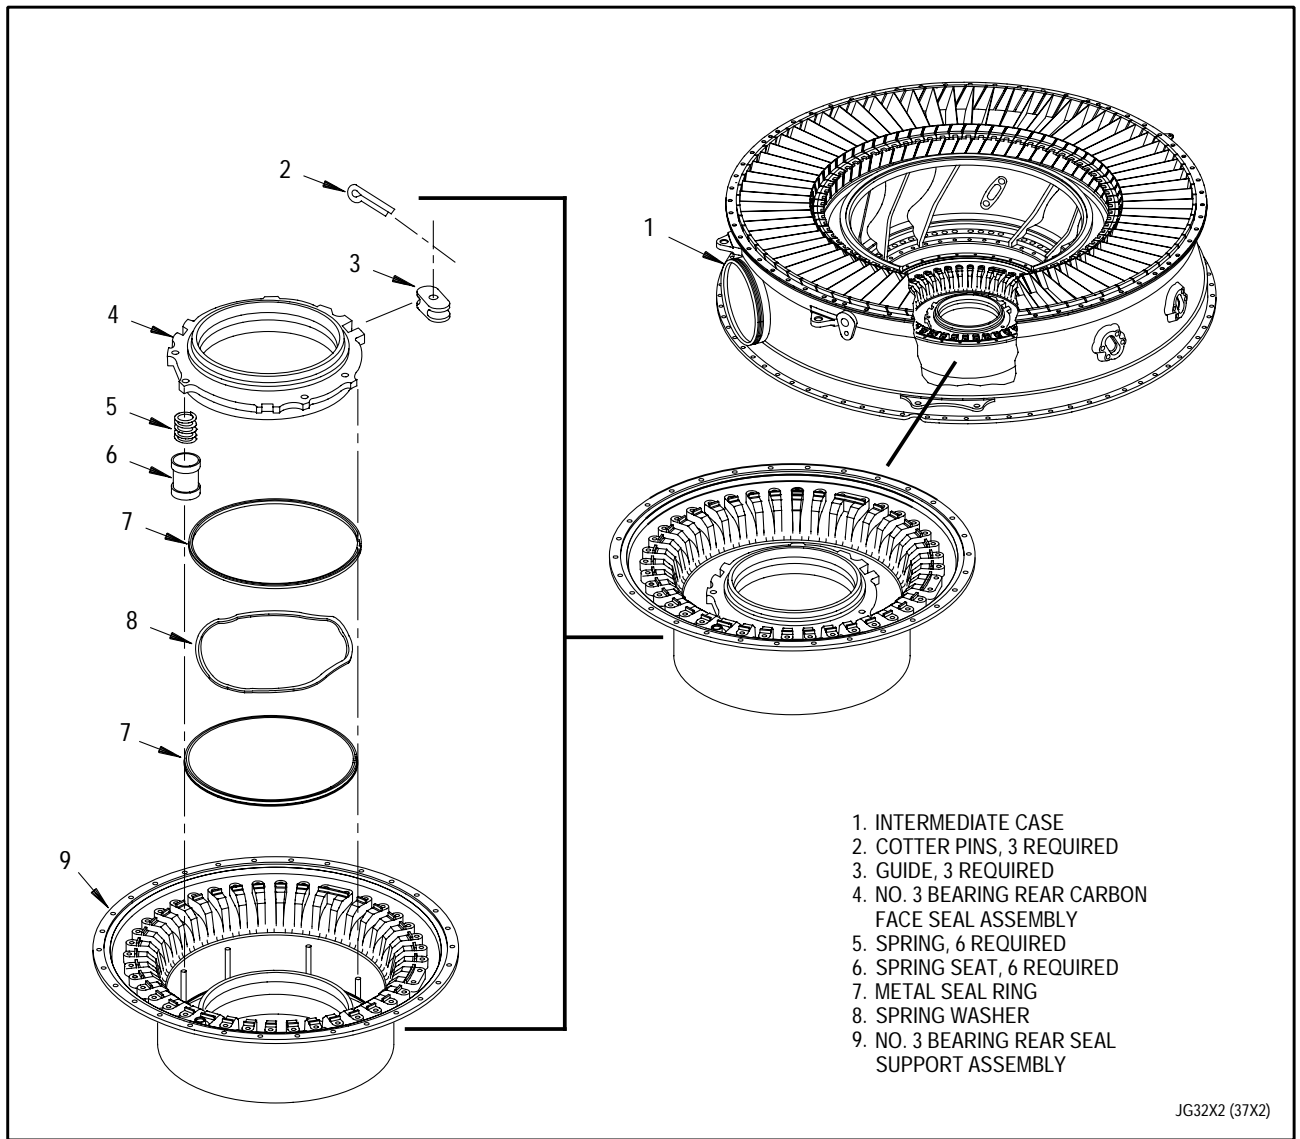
No. 3 Bearing Rear Carbon Face Seal Assembly - Removal
